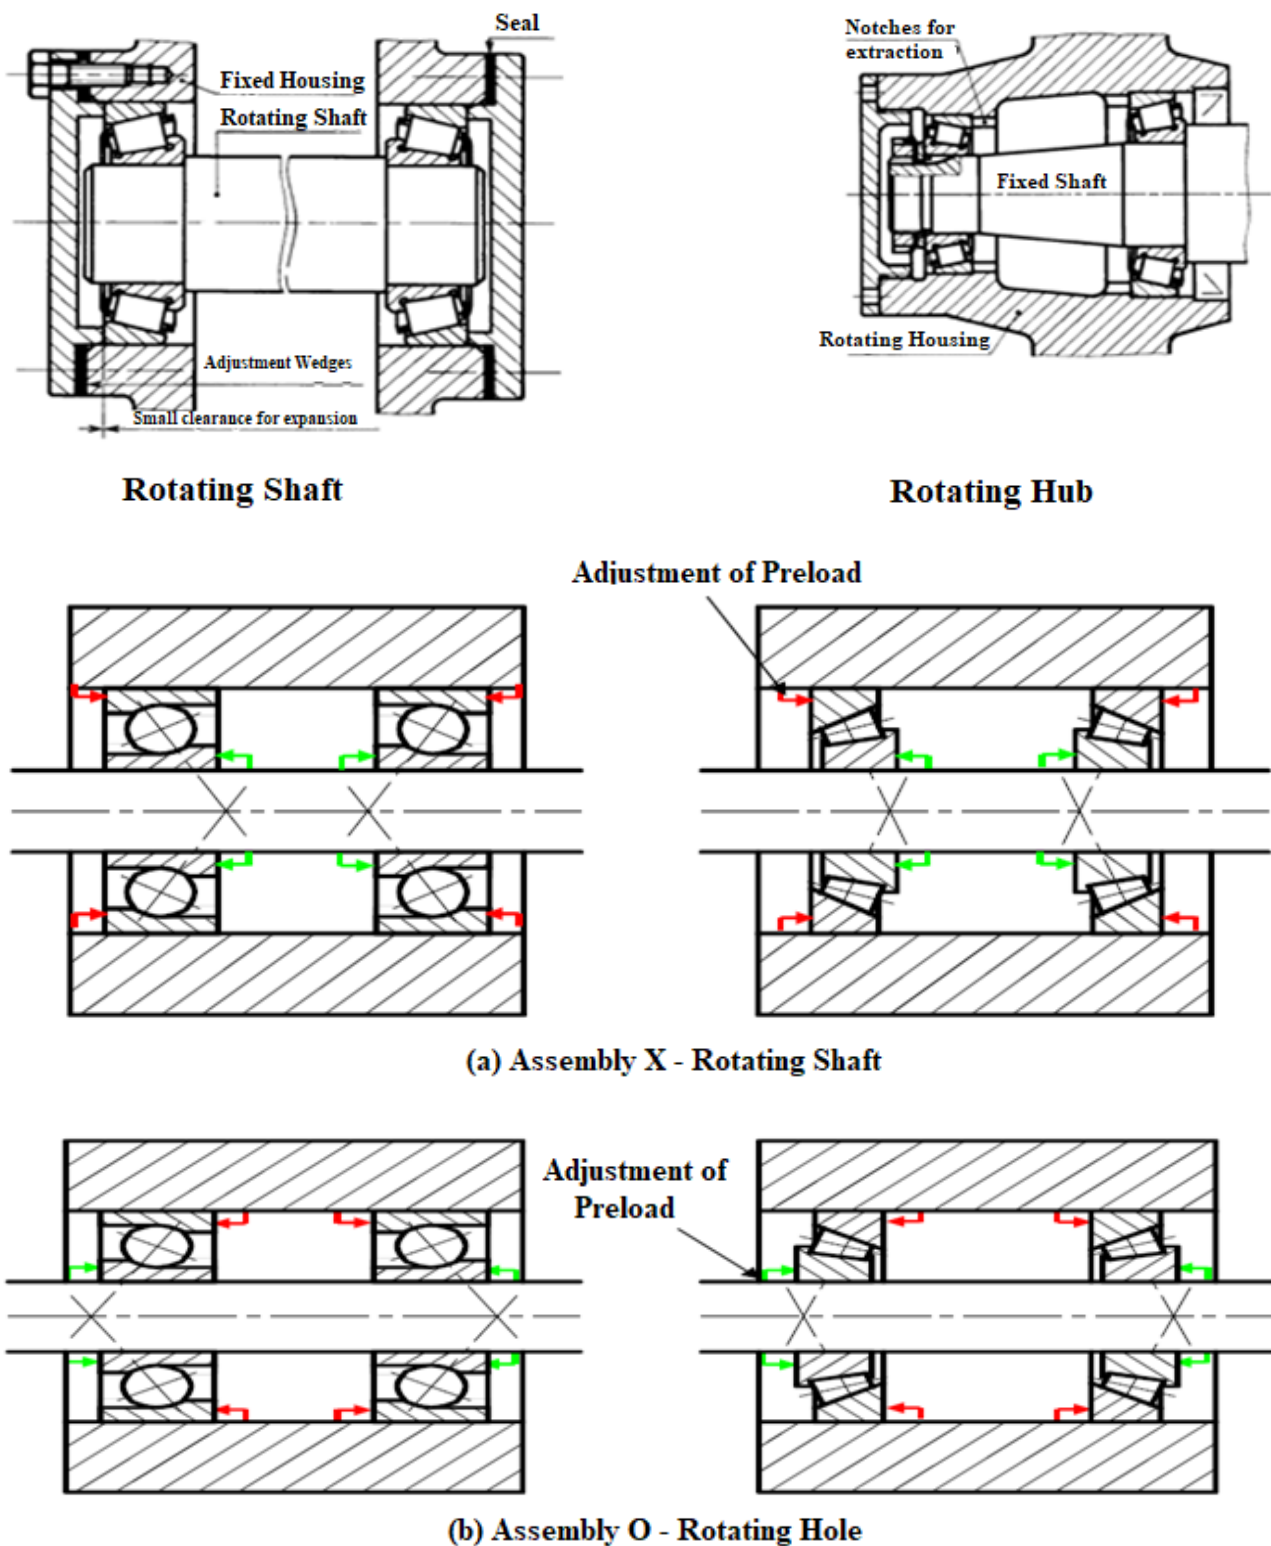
Assembly of Roller Bearings or Angular Contact Bearings
